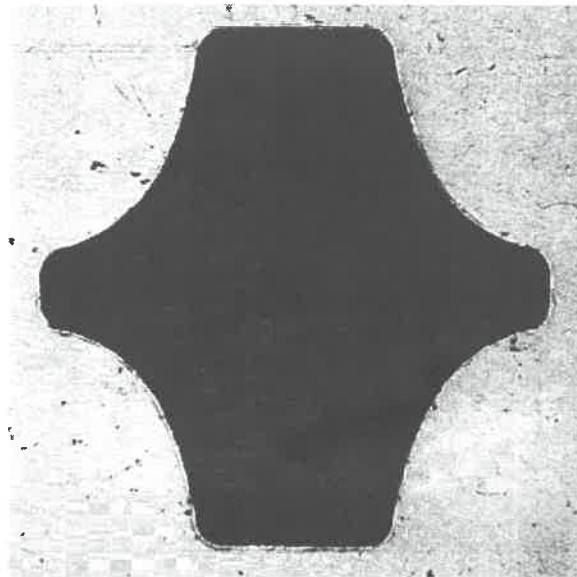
Light microscopy of a hole with hyperbolically shaped borders cut with a 50 μm diameter hard metal tool in a 50 μm thick brass foil.
